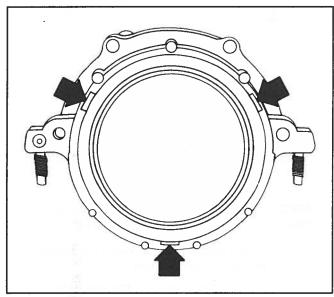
Removing One-Piece Rear Main Oil Seal
